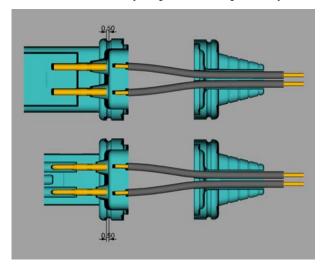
Assembly of the housings with wires and pins. Note that the pins go into the housings about 0.5 to 1 mm below the surface of the bathtub recess.
